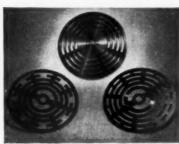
Hoerbiger-type compressorvalve assembly, showing valve plate and damper plate (bottom) in I.C.I.
